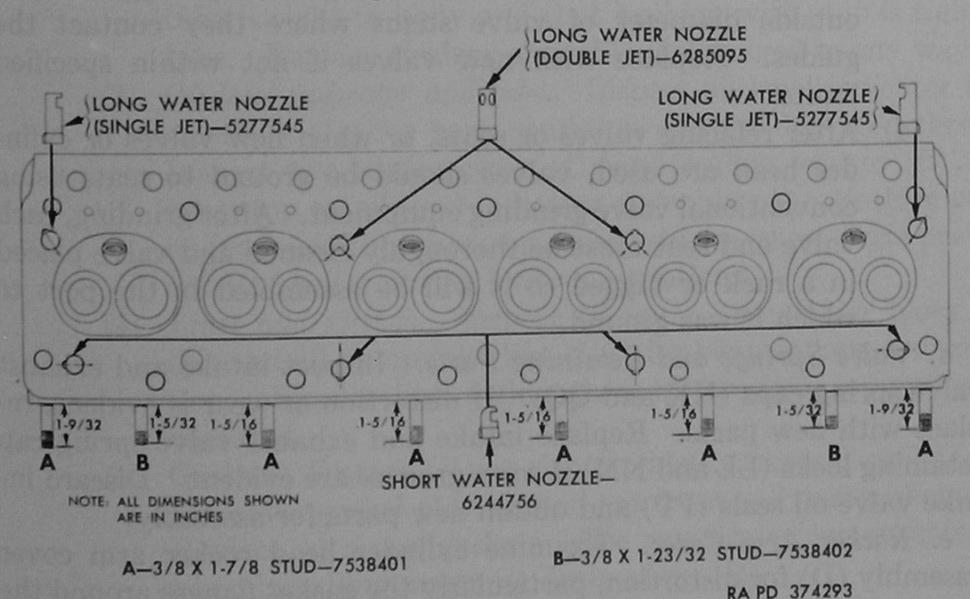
Cylinder head water nozzle identification (early engine assembly 7411599 only) and manifold stud driven height.
